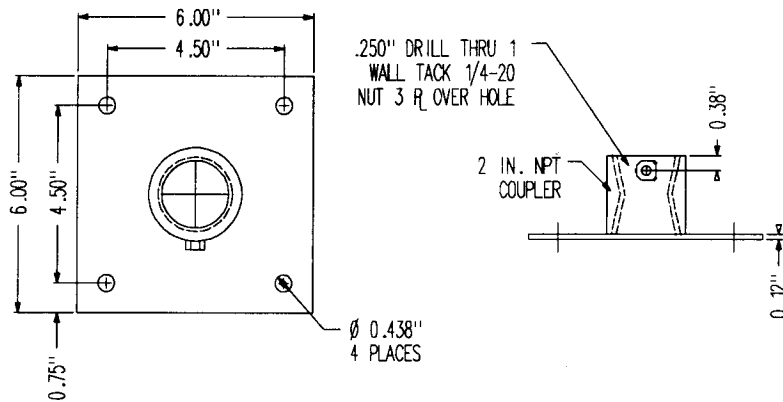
AMPRO 3600 CEILING MOUNT DIMENSIONS.
